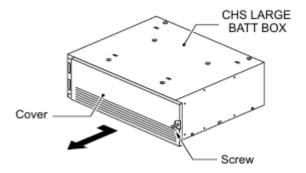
Removing CHS LARGE BATT BOX Cover
